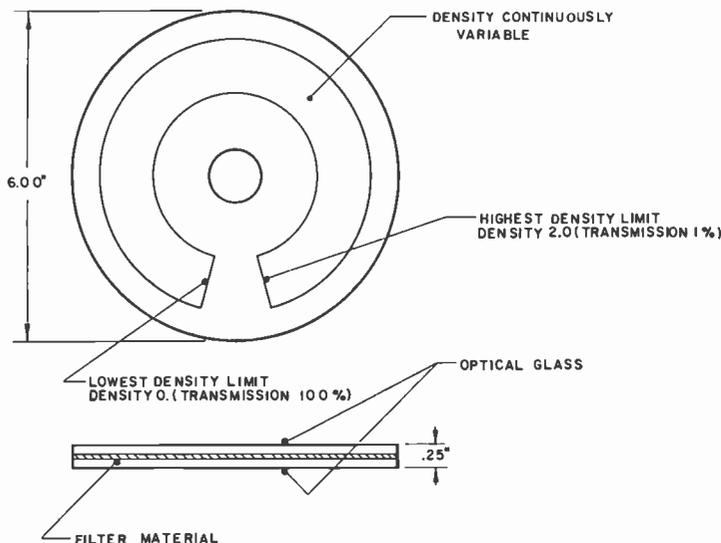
Outline drawing of the filter wedge used in the light intensity control.
